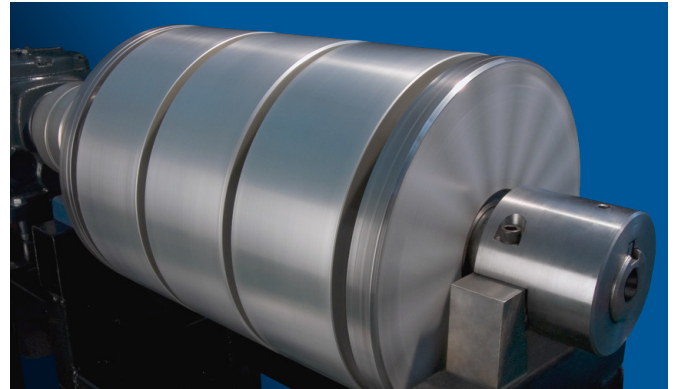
Prototype of Clawpole TFM with Hybrid stator.
